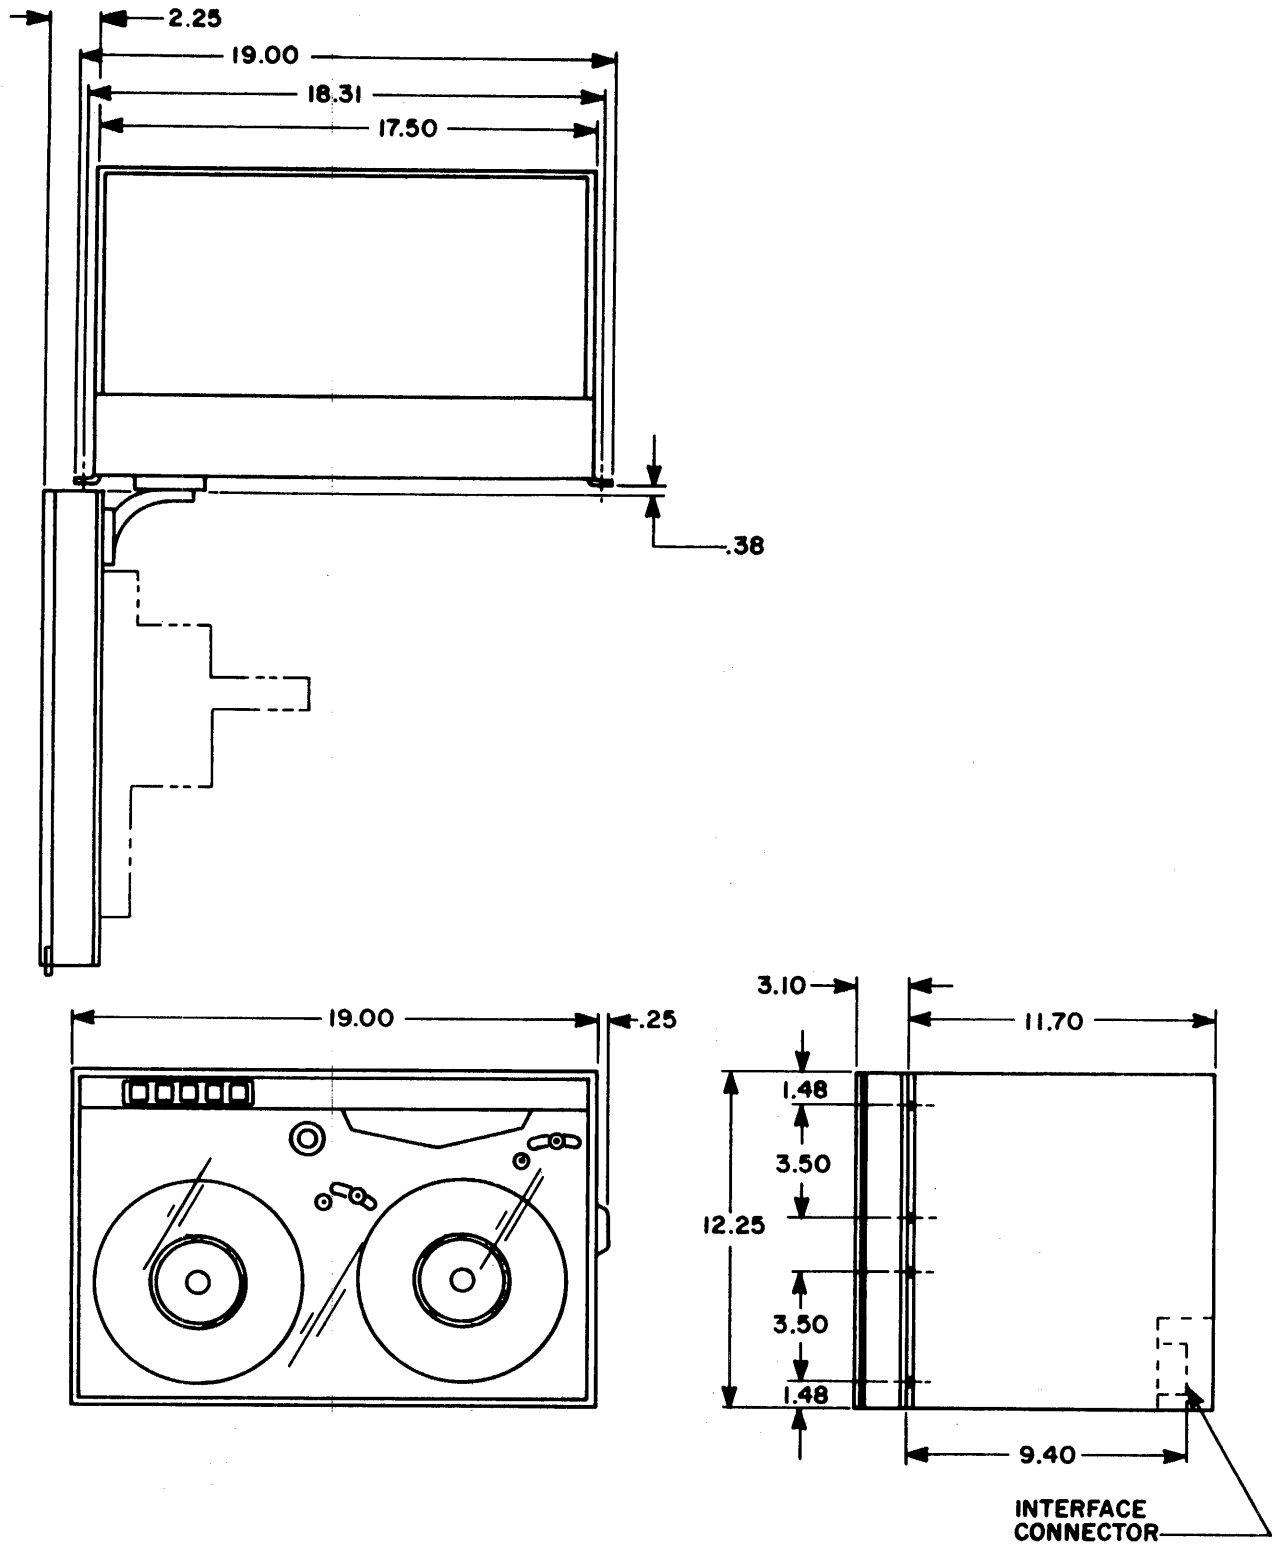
MOUNTING DIMENSIONS (8-1/2 INCH TRANSPORT)
